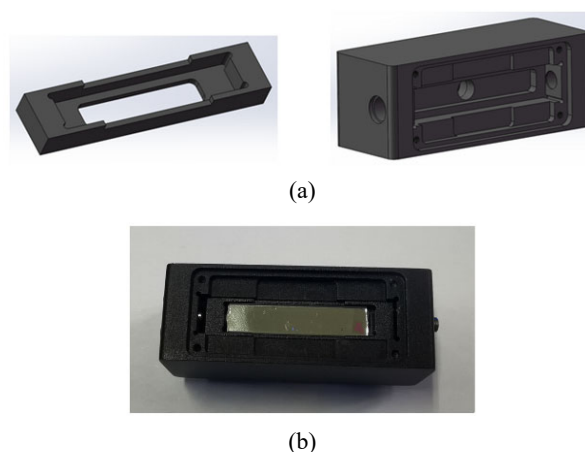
Design drawing of interferometer: (a) movable groove and internal engineering drawing of interferometer and (b) physical image inside the interferometer.
